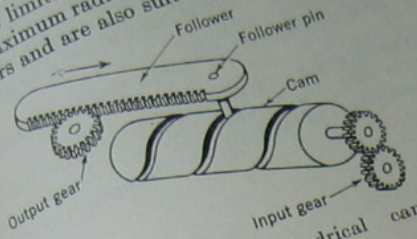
Grooved cylindrical cam. (Courtesy of Ford Instrument Co.)
